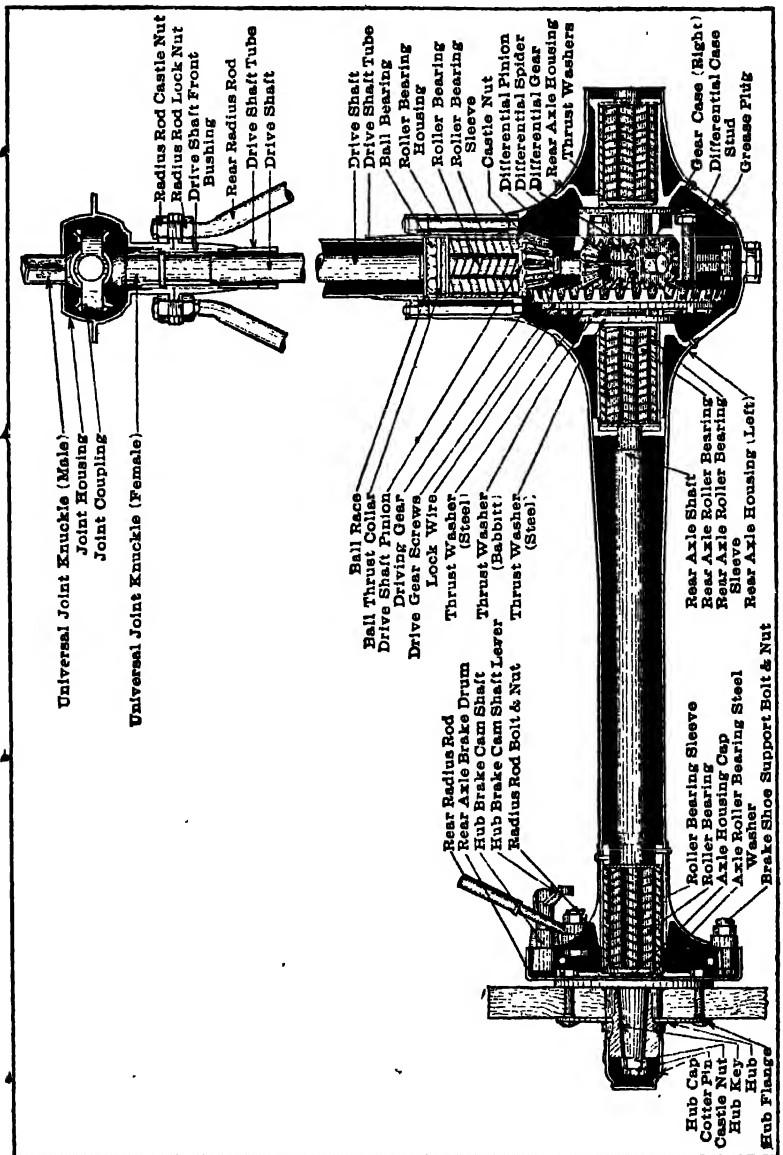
A.—Sectional View of Ford Model T Rear Axle, Showing Driving Gears, Differential, Power Transmission Shafts and Supporting Bearings.
